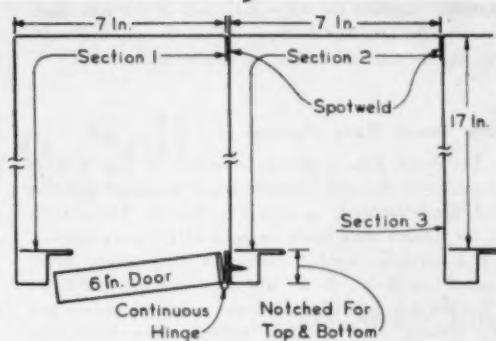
SHEET 30 IN. WIDE is braced for locker sections
